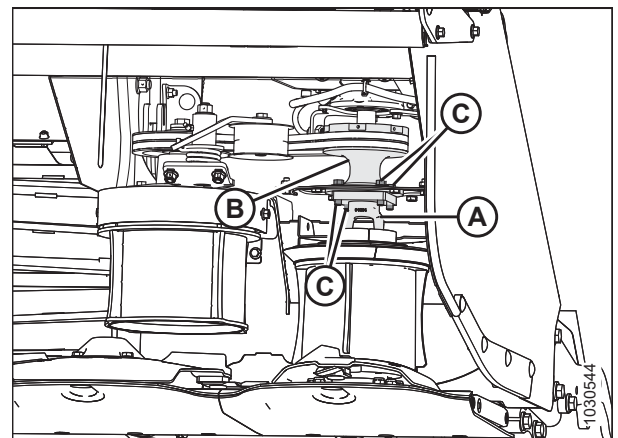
Left Driven Drum – Spindle Spline Dismounted
